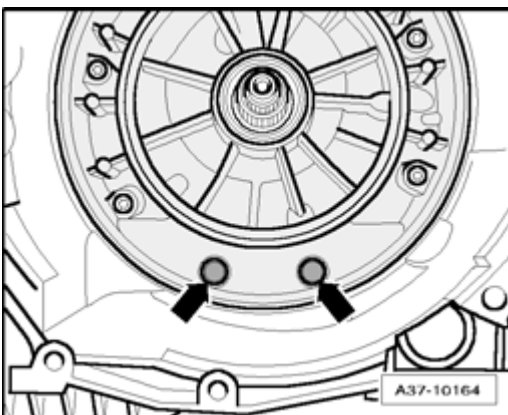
Caps For Threaded Connection Of ATF Supply At Bottom Of Converter Housing
